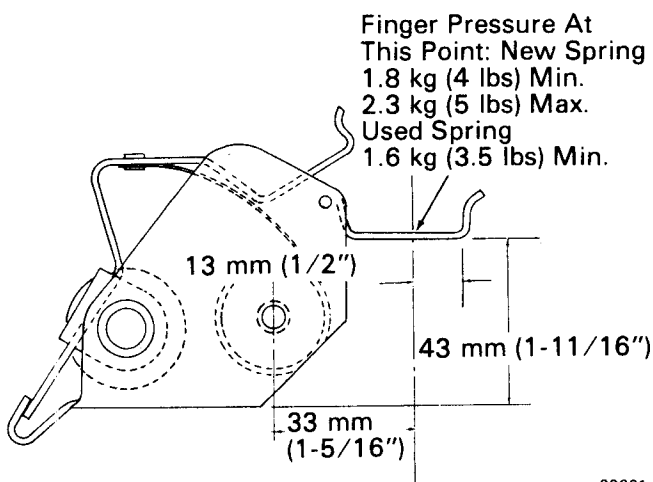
Measuring Constant Pressure Spring Type Brush Holder Finger Pressure (Spring Cell Removed)
